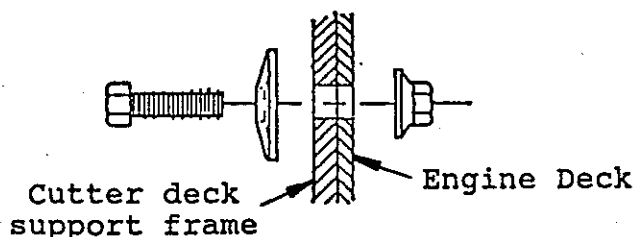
Whizlock nuts to inside of engine deck for the rear two holes.
